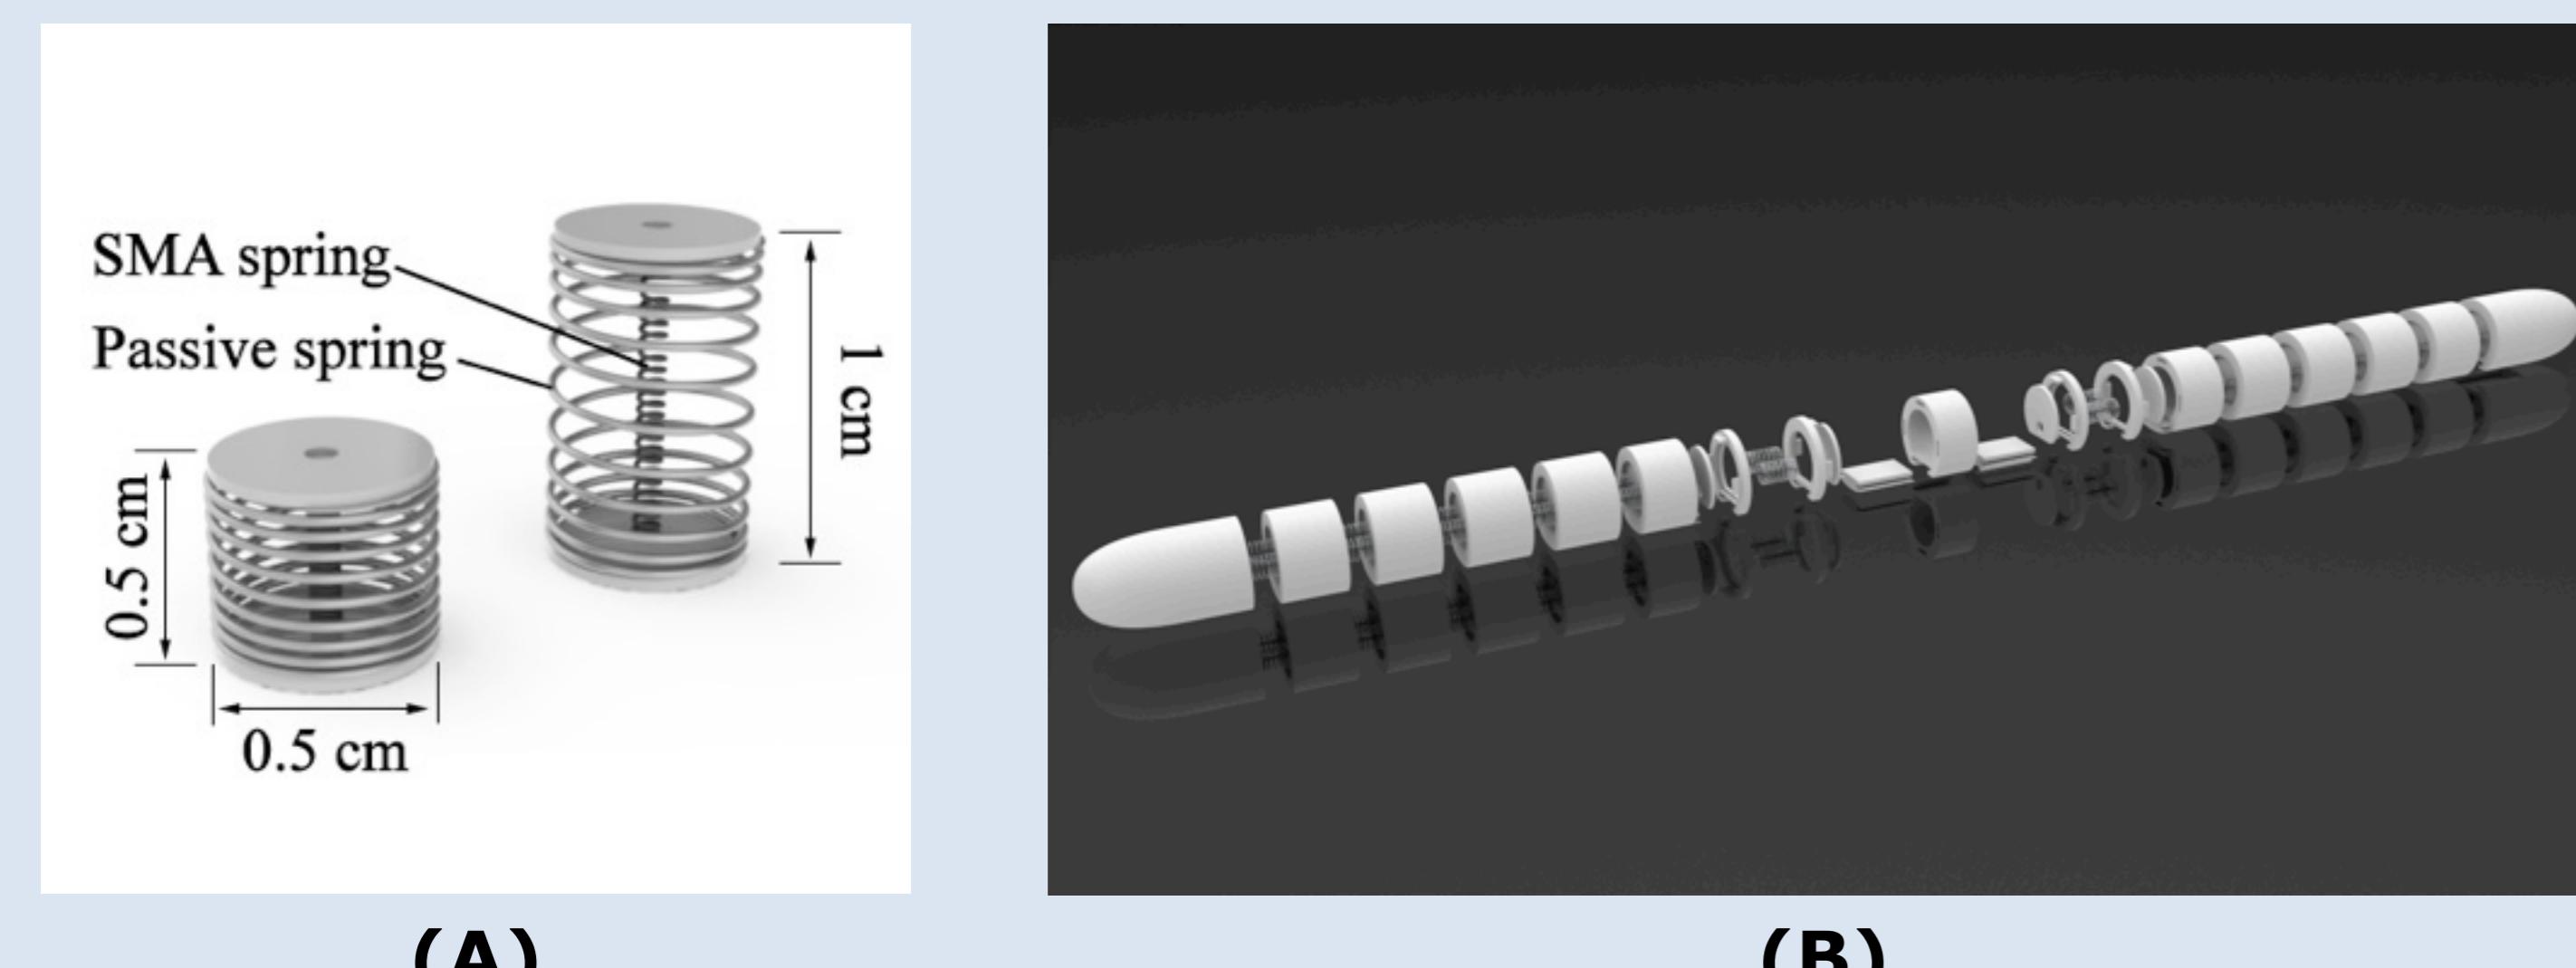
Proposed design of (A) linear actuator based on thermal SMA, and (B) whole robot assembly.
